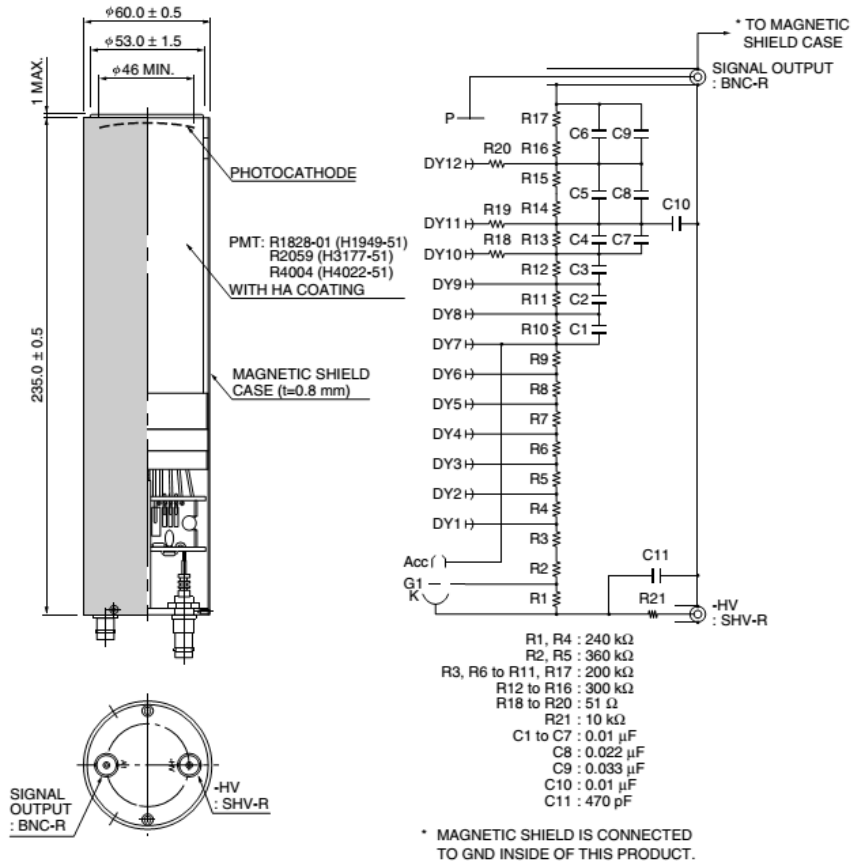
Photomultiplier Tube Assembly Dimensional Outline and Diagram (Unit: mm) (35).
